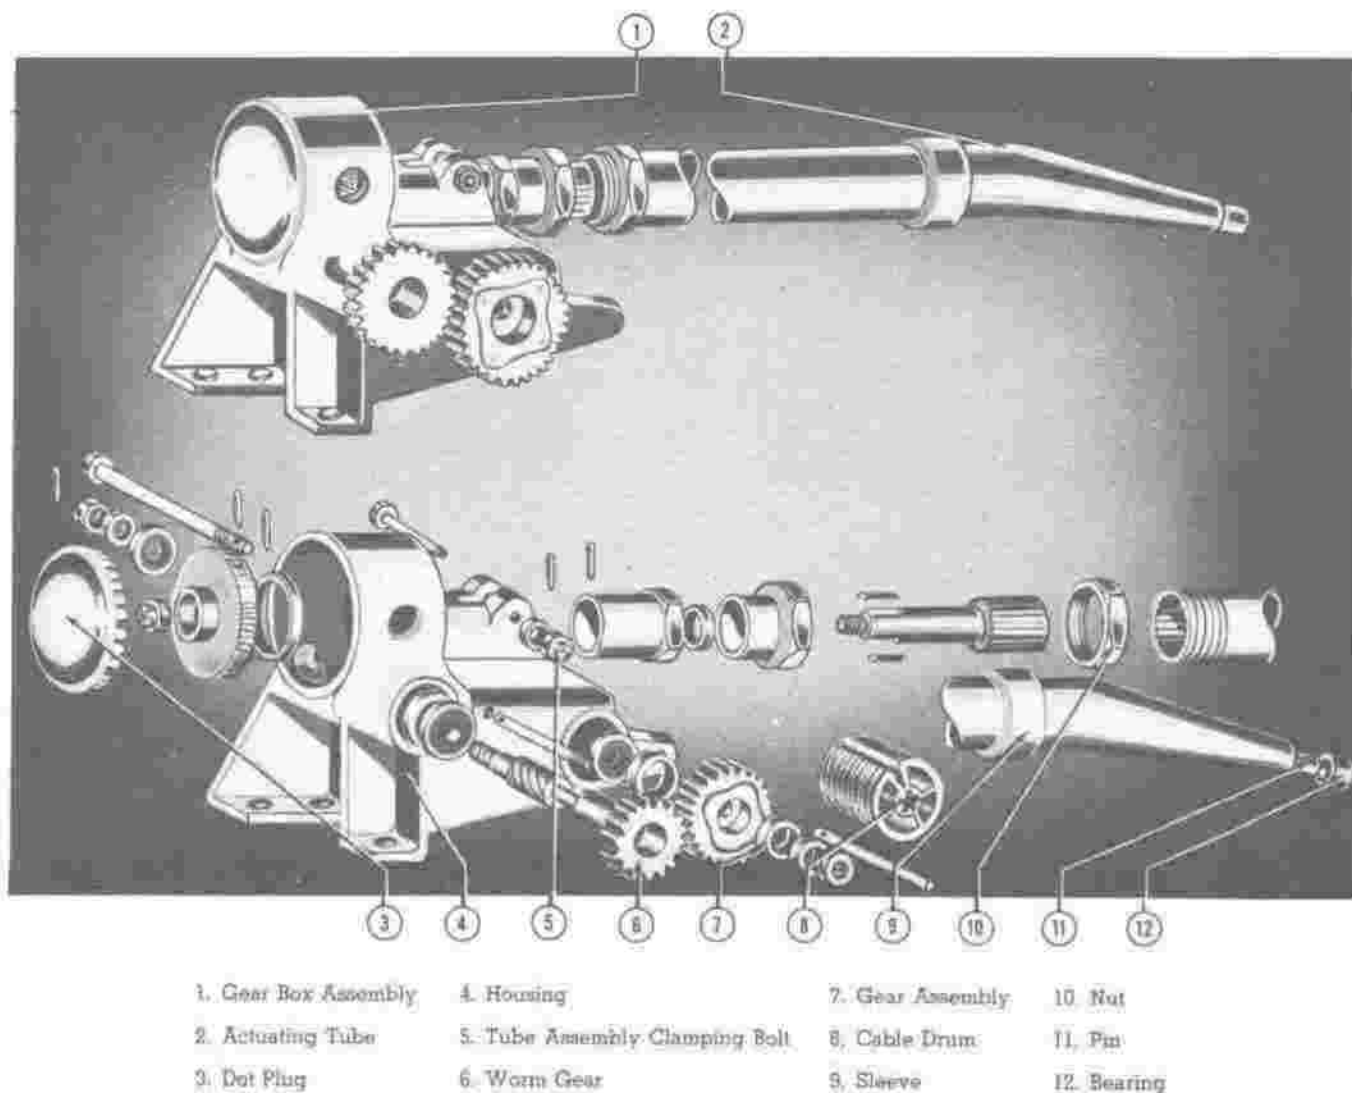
Trim Tab Mechanism (Typical for Elevator and Rudder)
